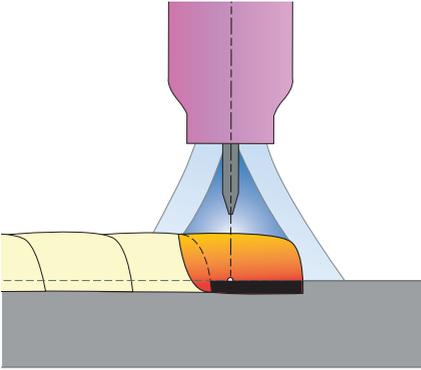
Cladding a horizontal surface in the flat welding position. A large part of the substrate is struck directly by the arc resulting in greater dilution.
